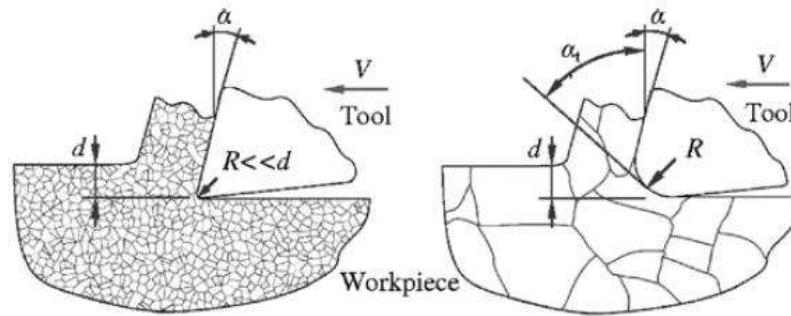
Comparison between tool edge radius, grain size, and undeformed chip thickness in traditional milling and micromilling [27]
